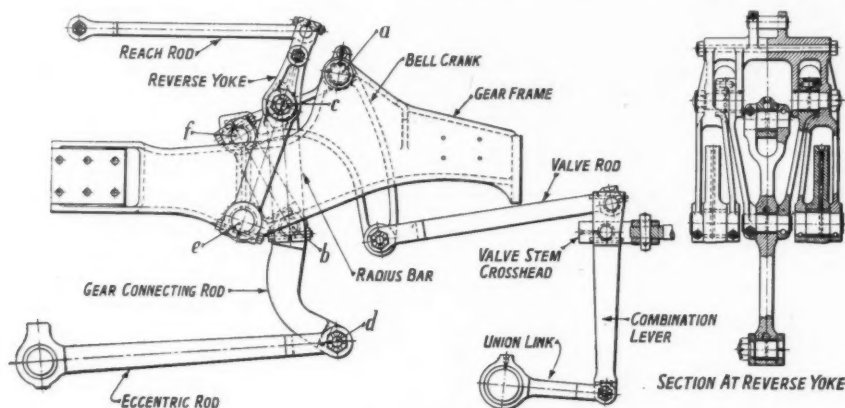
Baker valve gear assembly for American locomotive, showing the names of the component parts. All diagrams show gear arranged for inside admission
